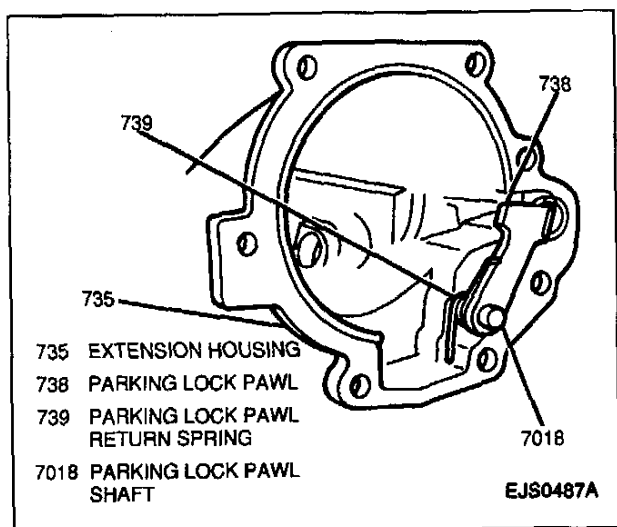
Parking Lock Pawl Return Spring, Shaft and Installation (3L30, 3-Speed)
